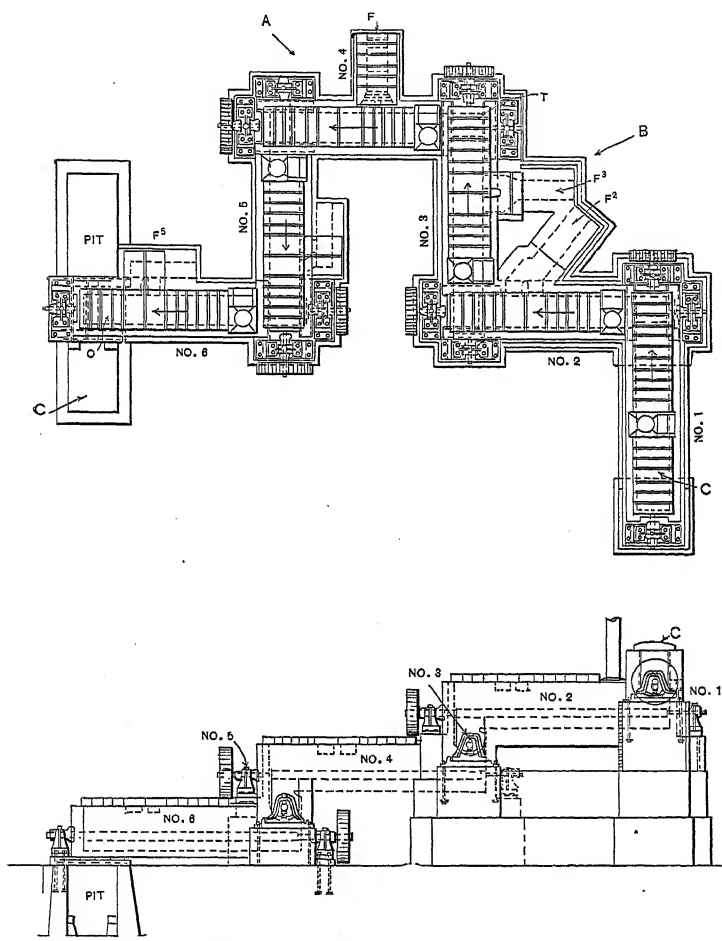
PLAN AND ELEVATION OF THE MIXERS.
